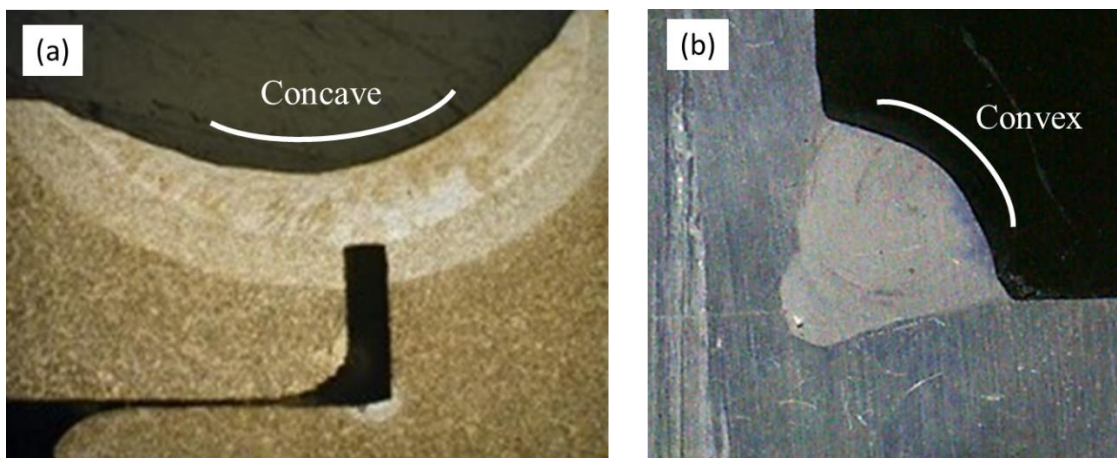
Weld sections (a) showing laser butt weld with a concave profile, and (b) showing MIG weld with a convex profile
